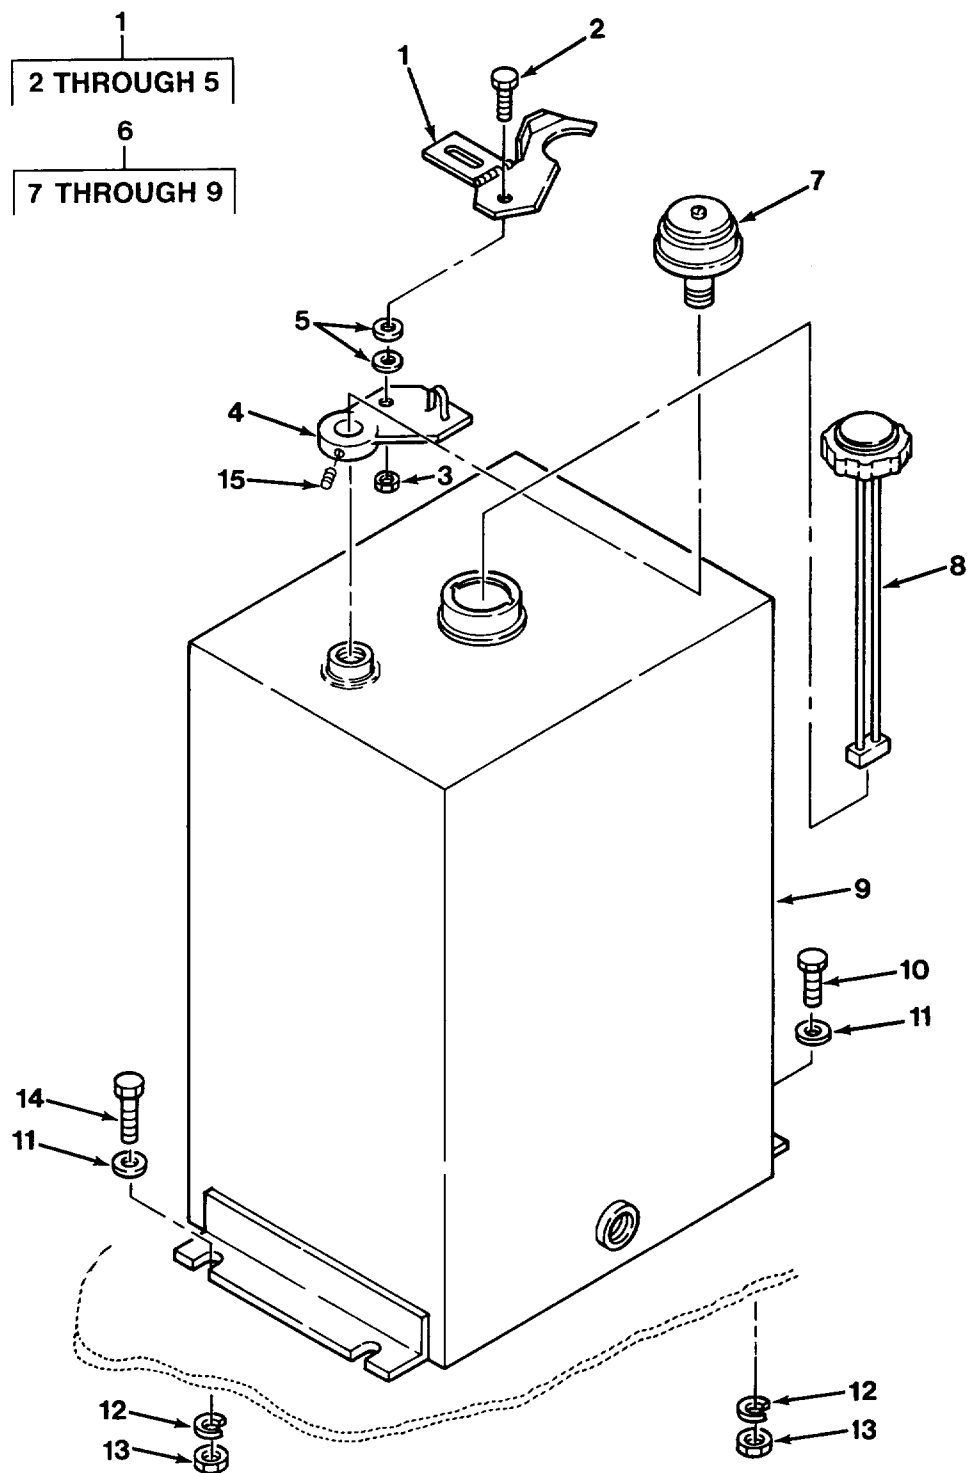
FLUSHING SYSTEM TANK ASSEMBLY
